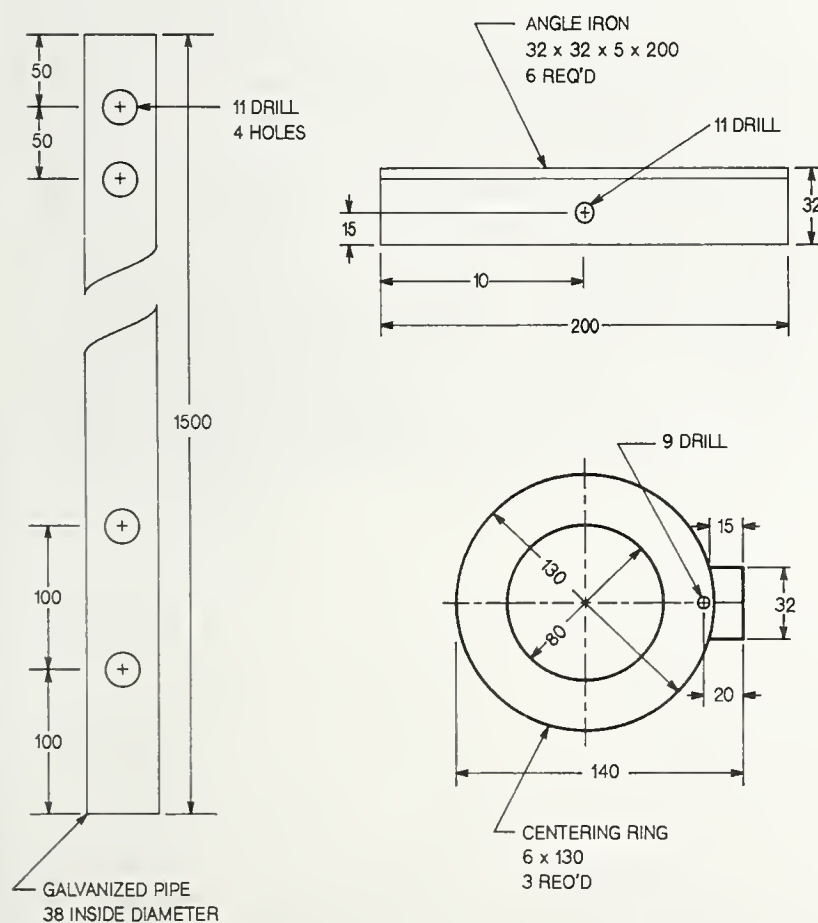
Drawing of angle iron, centering ring, and galvanized pipe 38 mm in diameter and 1.5 m long; dimensions are in millimeters.
